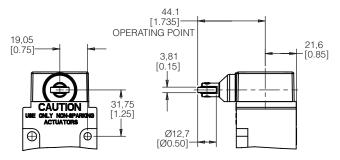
MICRO SWITCH BX Series Adjustable Side Pin Plunger, Head Code W • mm [in]
